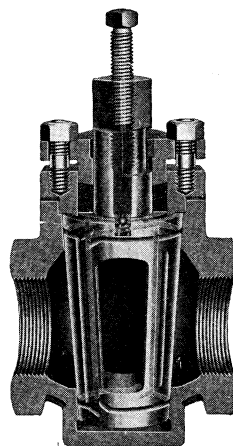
BARCO MANUFACTURING CO., LUBRICATED CURB COCK
